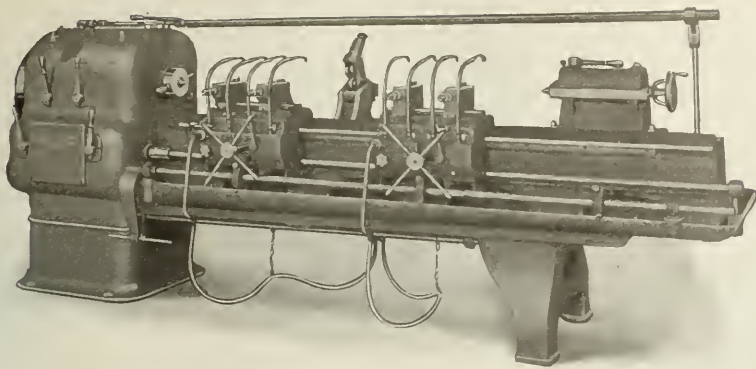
Front View of Fitchburg 8-inch "Lo-swing" Lathe
